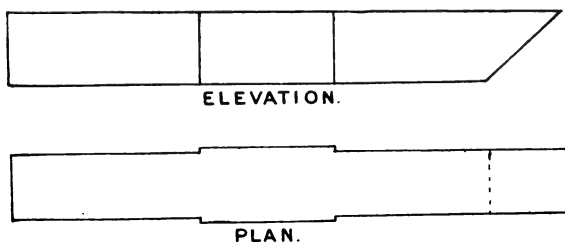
Single Cutter for Clarke & Steavenson's Machine.
